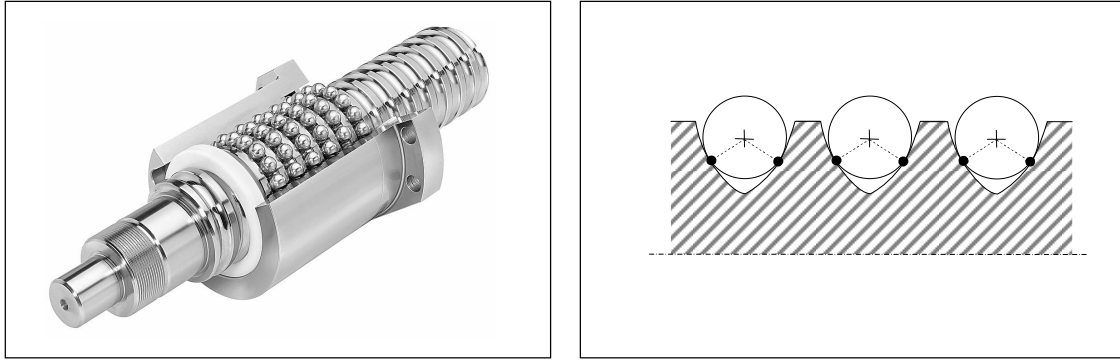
Ball screw open view (left) and a section view of a spindle with altered helical grooves to eliminate backlash (right).
